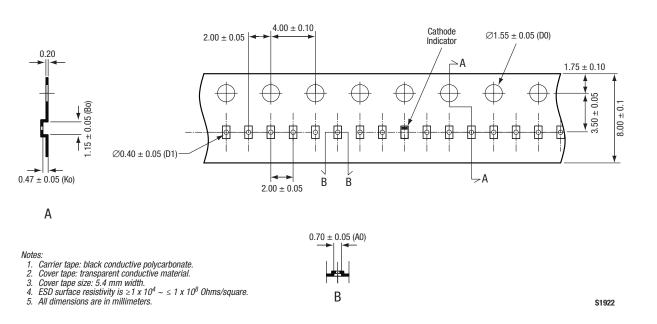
SMV2025-040LF Tape and Reel Dimensions (SC-79)
